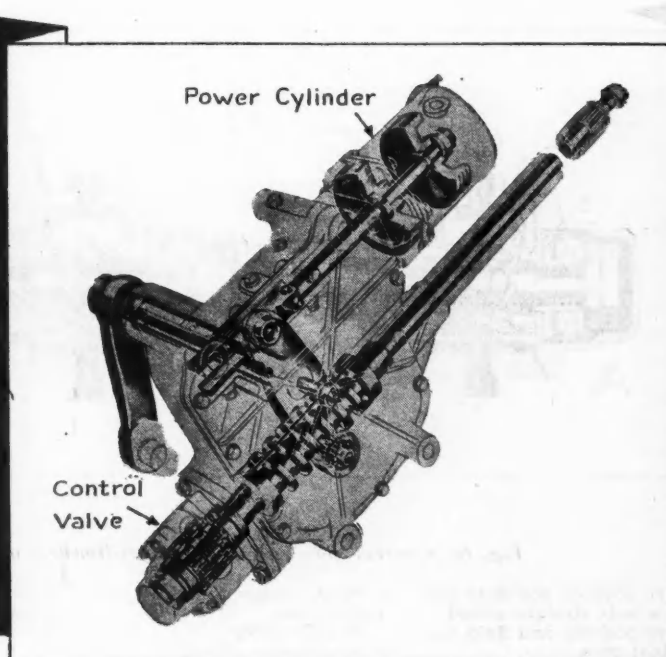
Ross-Bendix—integral hydraulic steering gear
